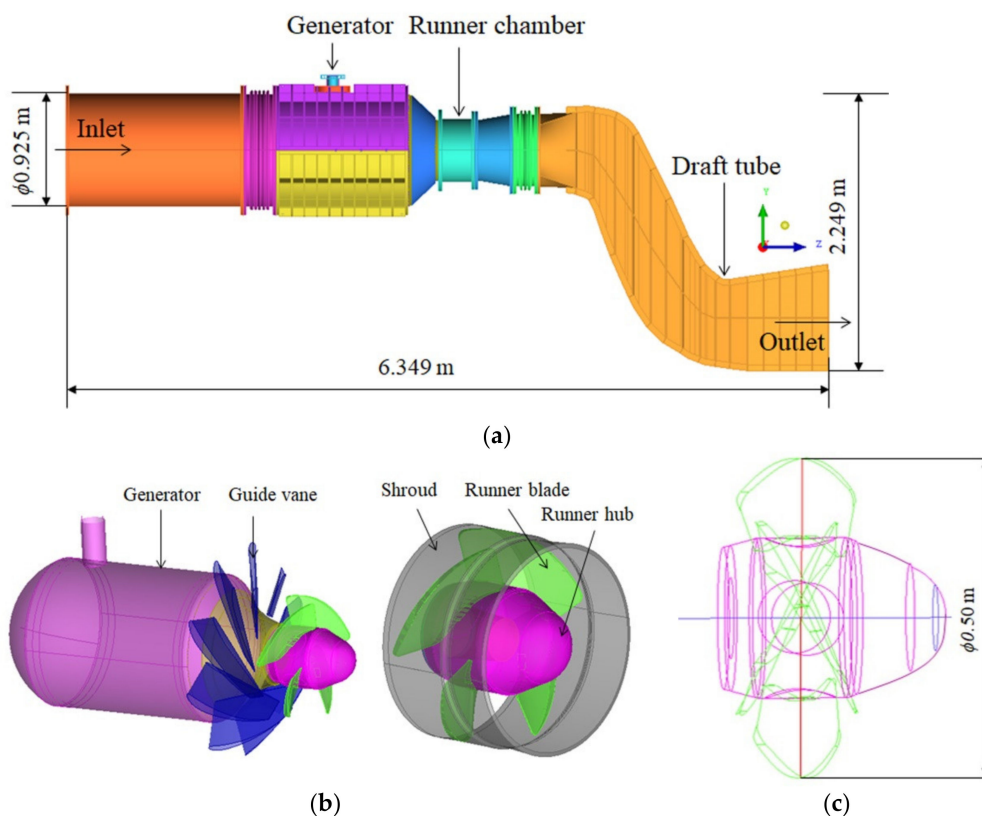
Three dimensional (3D) geometry of a propeller type turbine: (a) turbine; (b) generator, runner, and guide vane; (c) dimension of runner.
